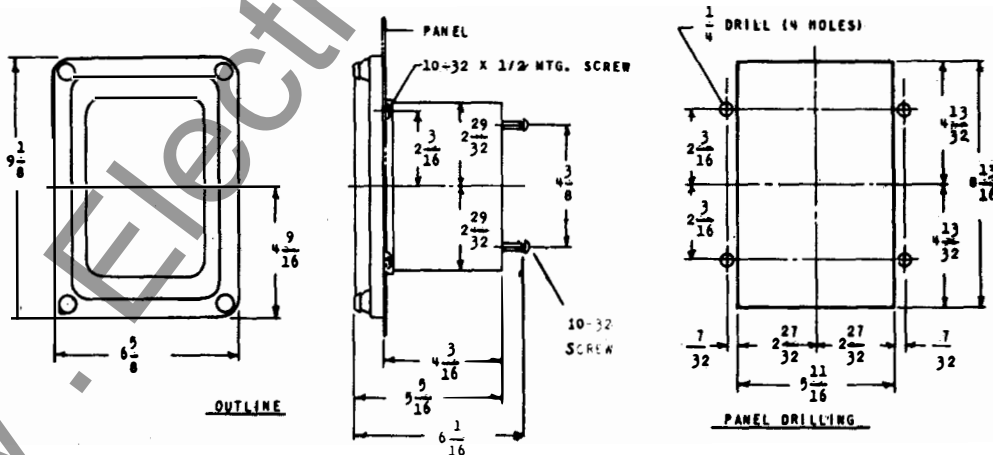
Outline and Panel Drilling Dimensions for Type HFA Relays in "E" Case
